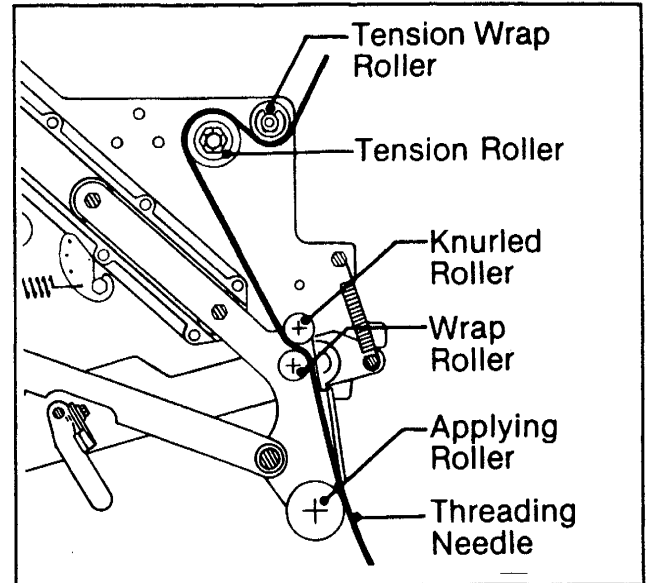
A - Tape Threading Diagram - Bottom Taping Head - Left Side View
